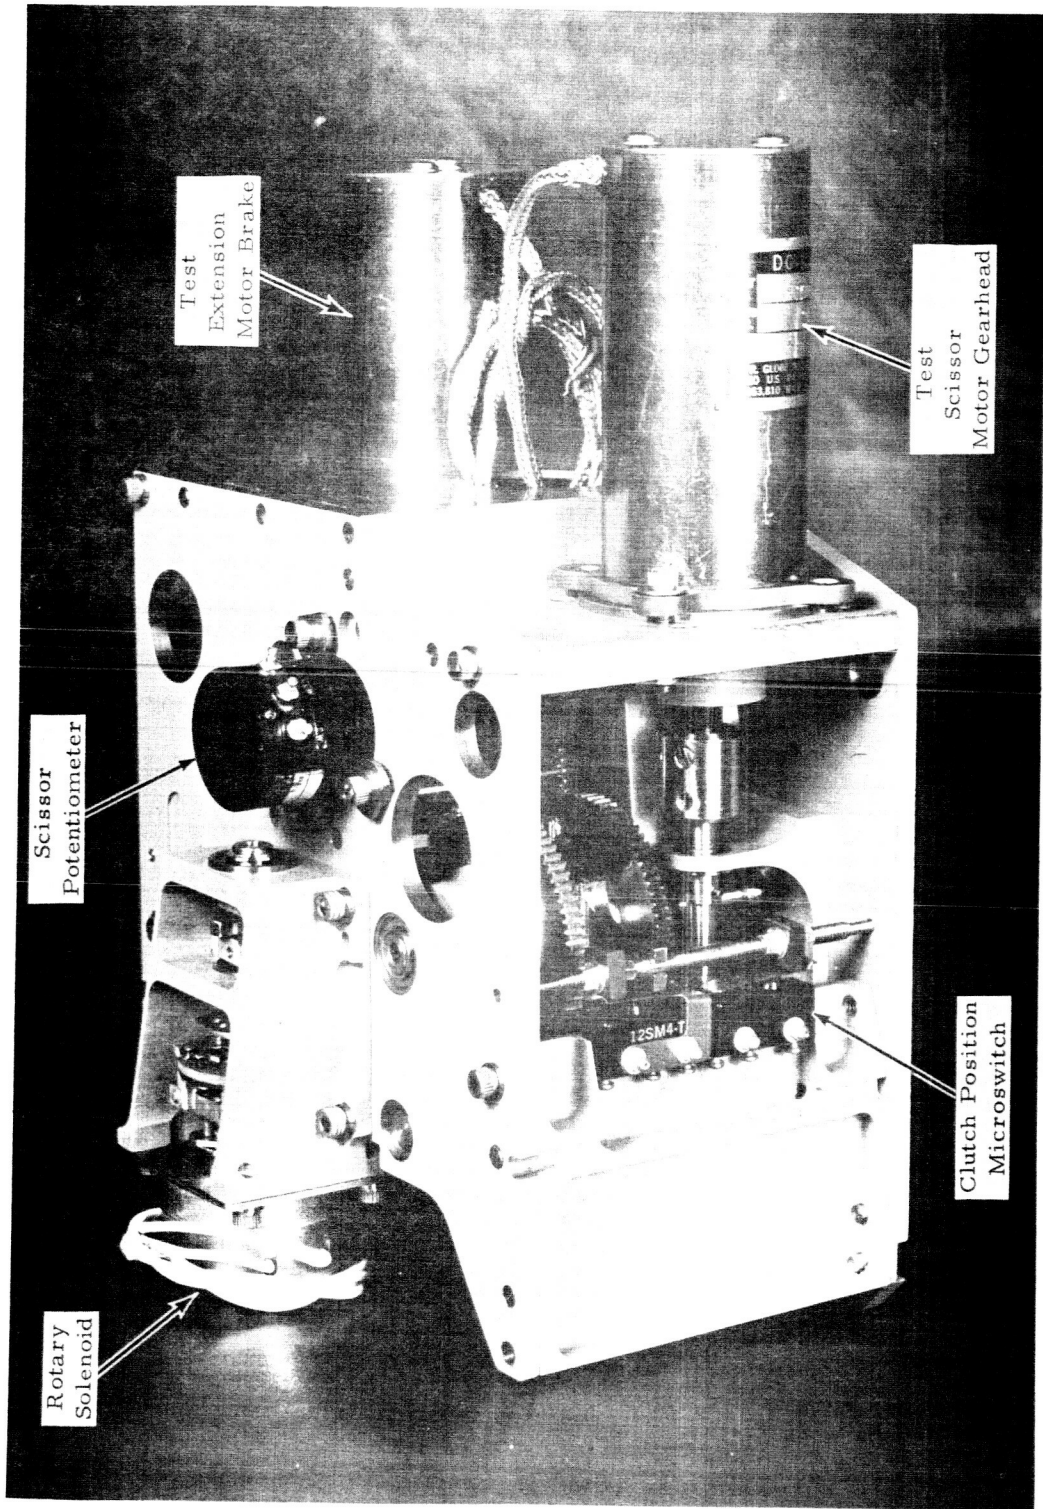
Scissoring Mechanism, Transmission Assembly
